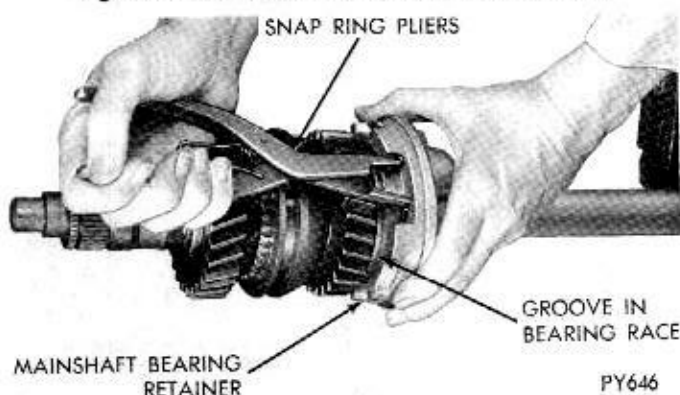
Snap Ring Spread, to Remove or Install Retainer on Mainshaft Bearing
